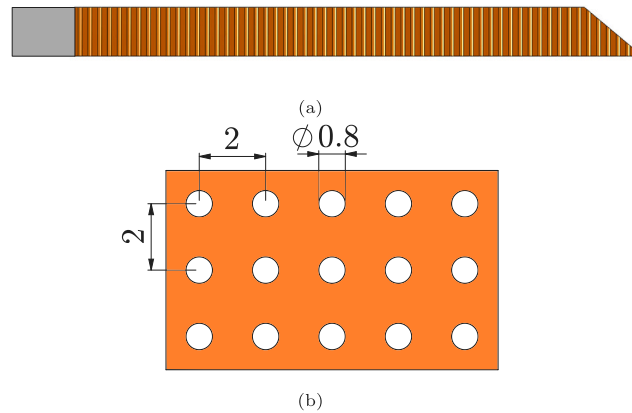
(a) Perforated trailing edge with cylindrical holes. (b) Hole dimensions of the perforated structure. Dimensions in mm.
